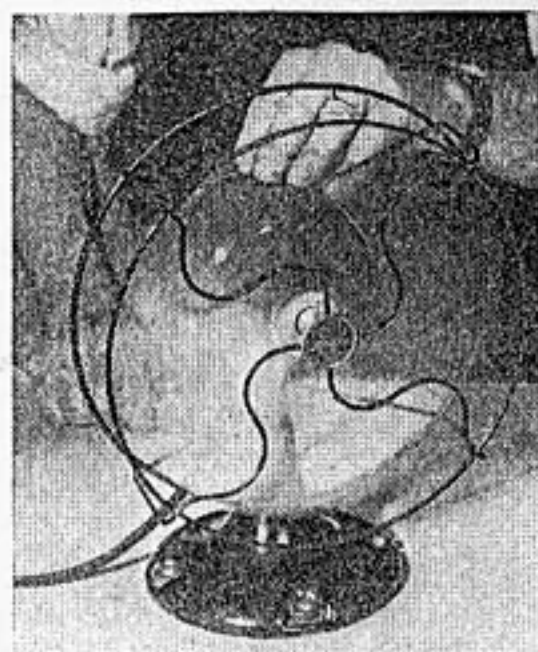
Testing the fan for unbalance by placing a hand on the motor.
